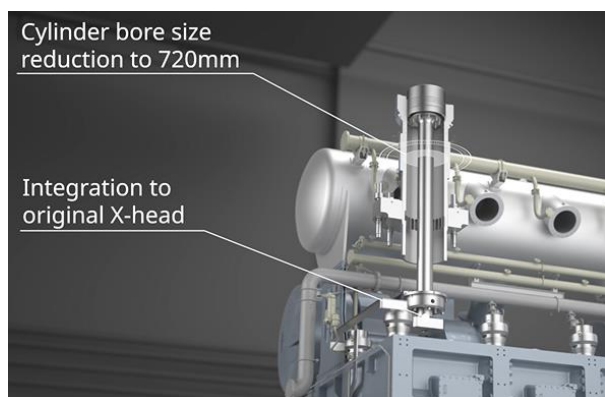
Schematic of the new cylinder liner with adapter piece, piston, piston rod and stuffing box being inserted in the original engine structure.
